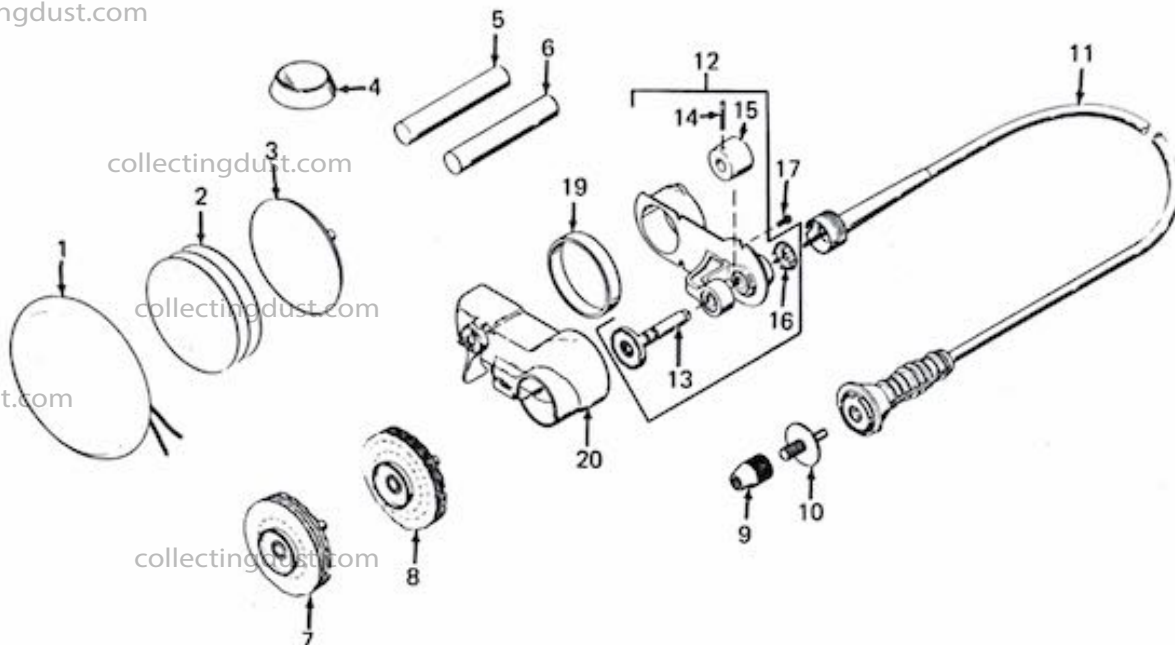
Kirby HERITAGE Handi-Butler group, exploded view
